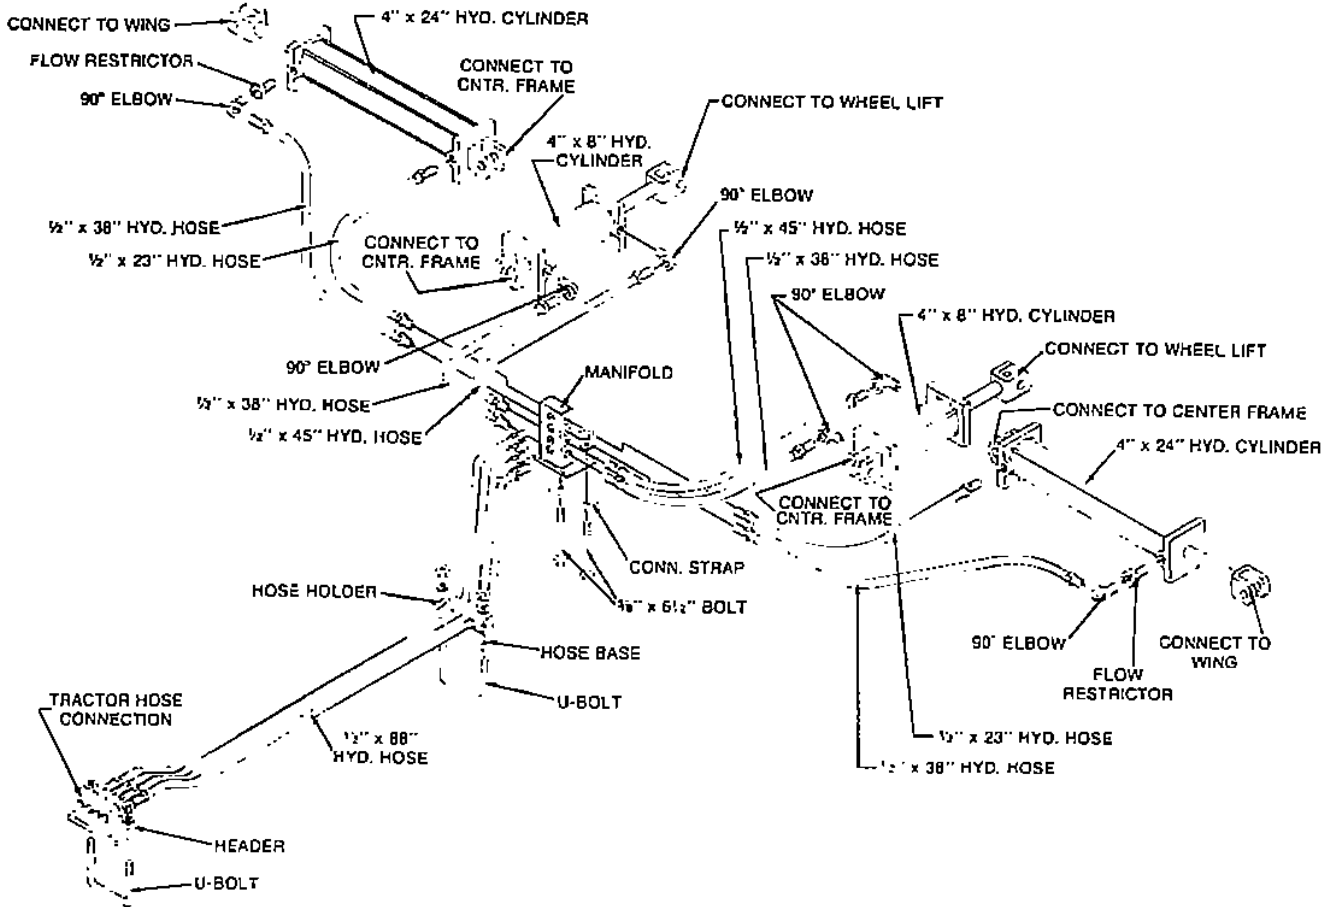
HYDRAULIC HOSE ASSEMBLY
